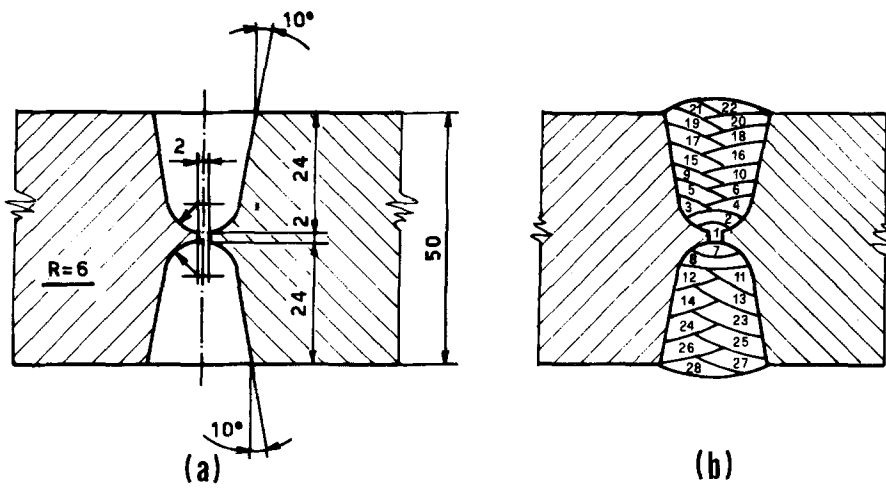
Details of the submerged arc-welding with multipass procedure. (a) shape and dimensions (mm) of the symmetrical double-U groove profile; (b) sequence of the weld passes.
